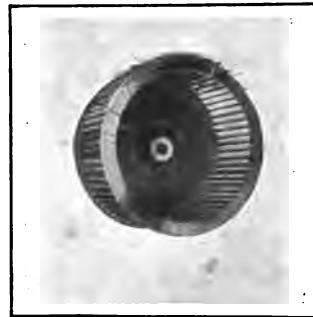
MULTI-BLADE CENTRIFUGAL FAN WHEEL
